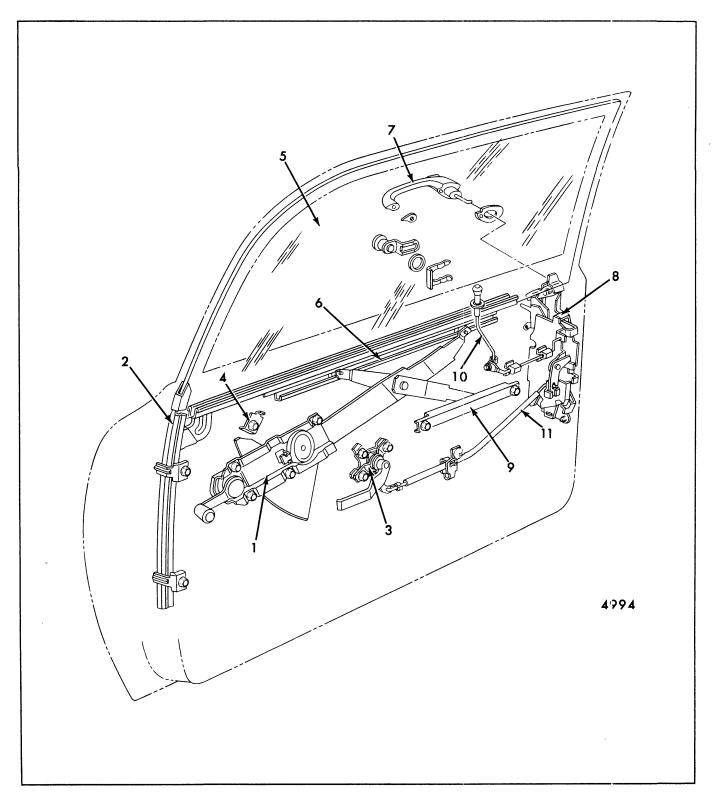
Front Door Hardware - "X-17,27,69" Styles
